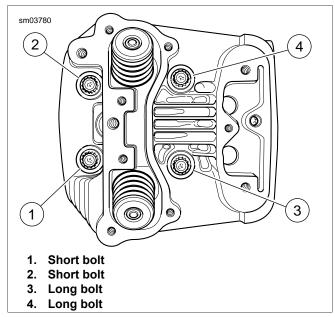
Rear Cylinder Headbolt Torque Sequence
